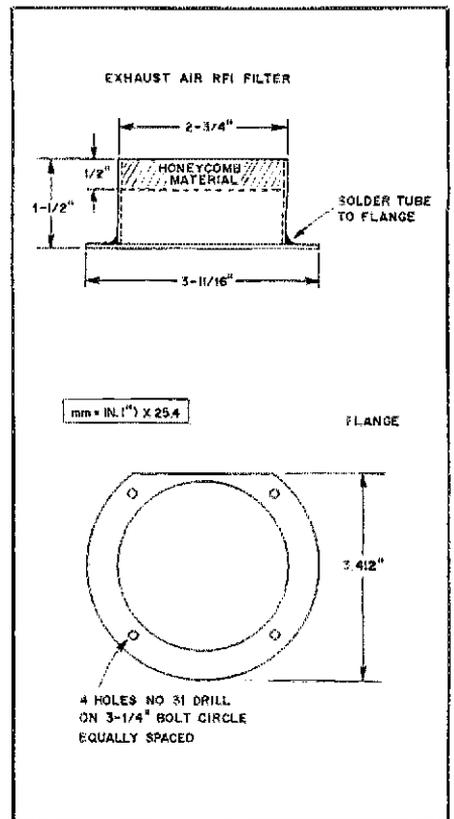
Mechanical details of the exhaust air RFI filter. The honeycomb material is soldered inside a 2-3/4-in OD, 0.065-in wall brass tube. The flange, which bolts to the chassis, is made from 0.125-in-thick brass sheet.
